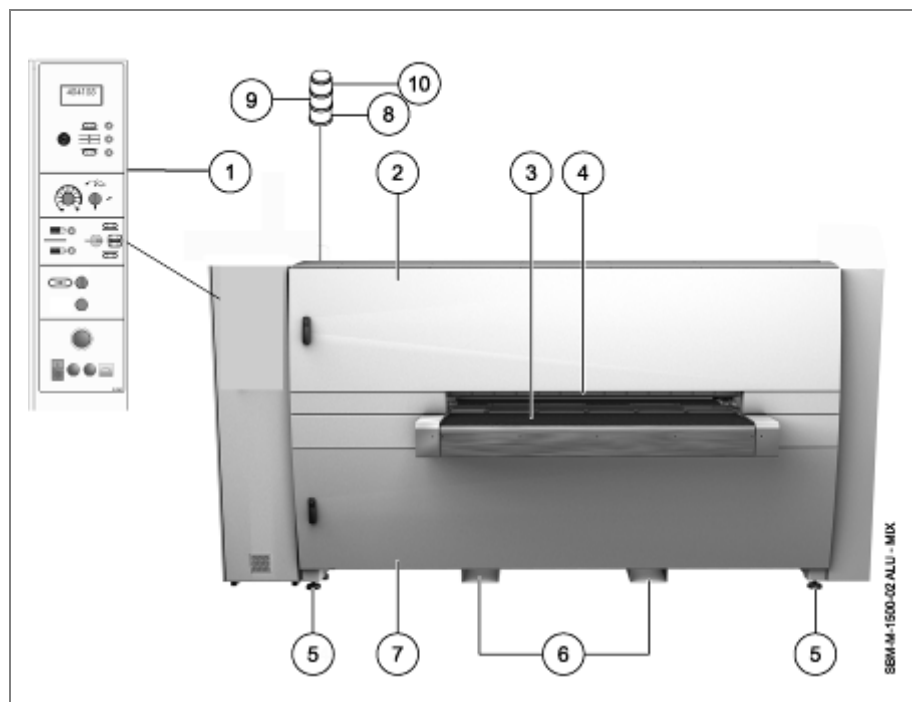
Components of the machine, input side (front side of SBM-M S2 ALU MIX)
